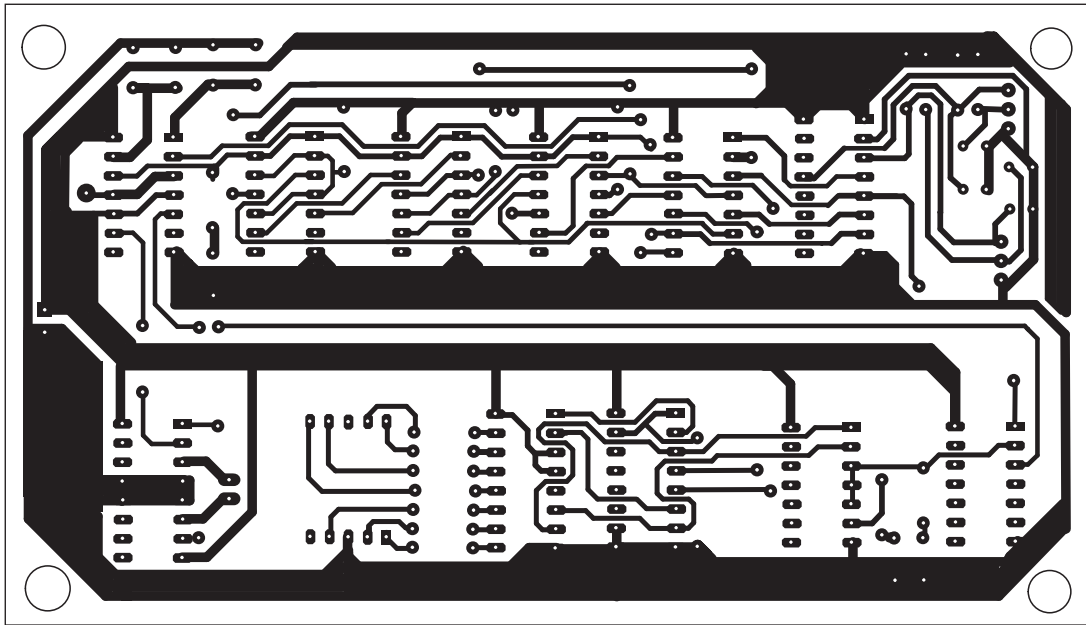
Actual-size, single-side PCB for circuit in Fig. 3
